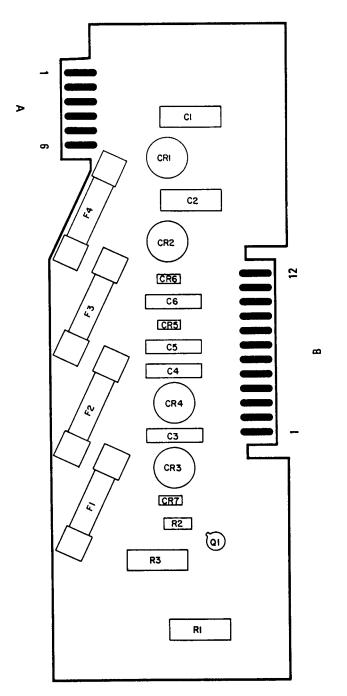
A15, Rectifier Assembly, Components (CHANGE 12)
